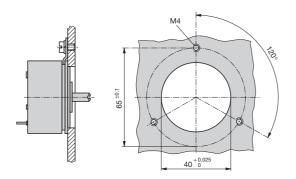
Drilling plan for fixing with 3 spring clamps.
